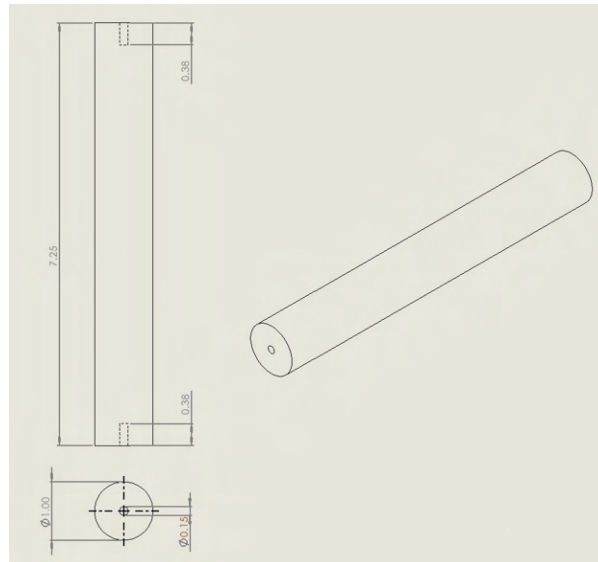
This figure shows the engineering drawing of the long post that attaches to the baseplate and supports the slider arm.
